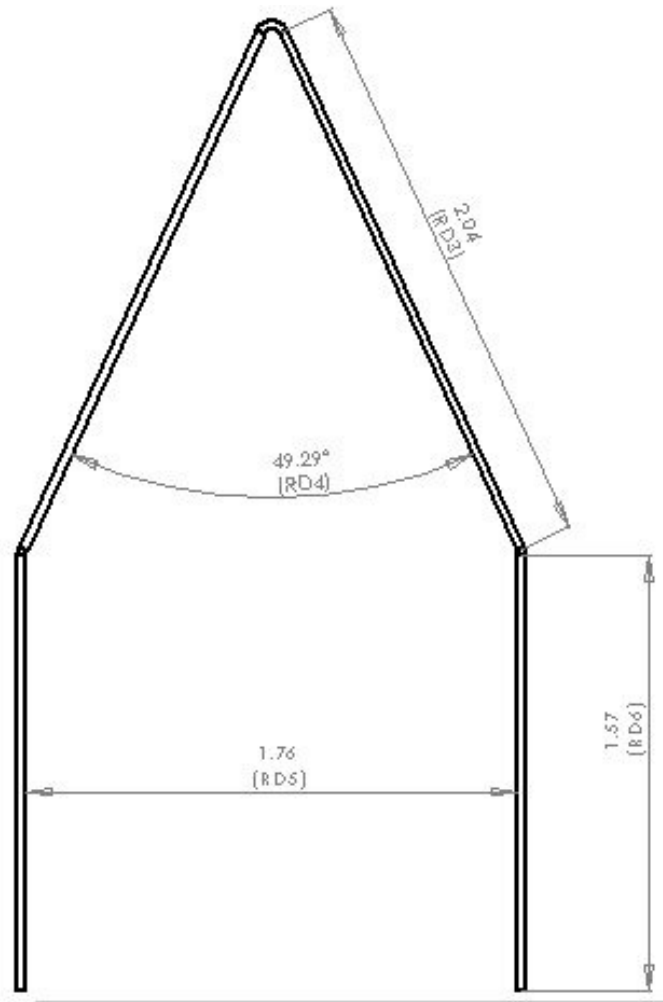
Mechanical drawing of bent sheet-aluminum fairing cross-section. Dimensions in inches. They are ~ 32.5 inches (825 mm) long.
